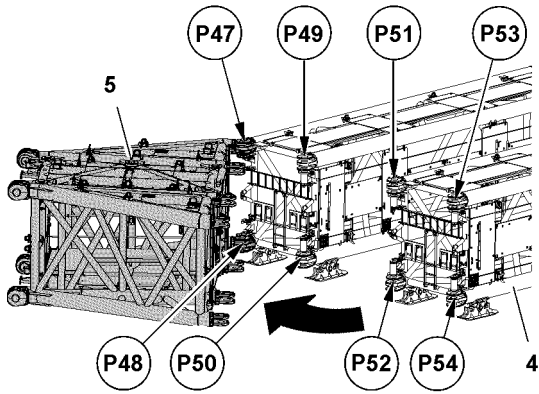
Disassembling the upper P-adapter on the Li-intermediate sections - Disassembling the upper P-adapter completely on the Li-intermediate sections
